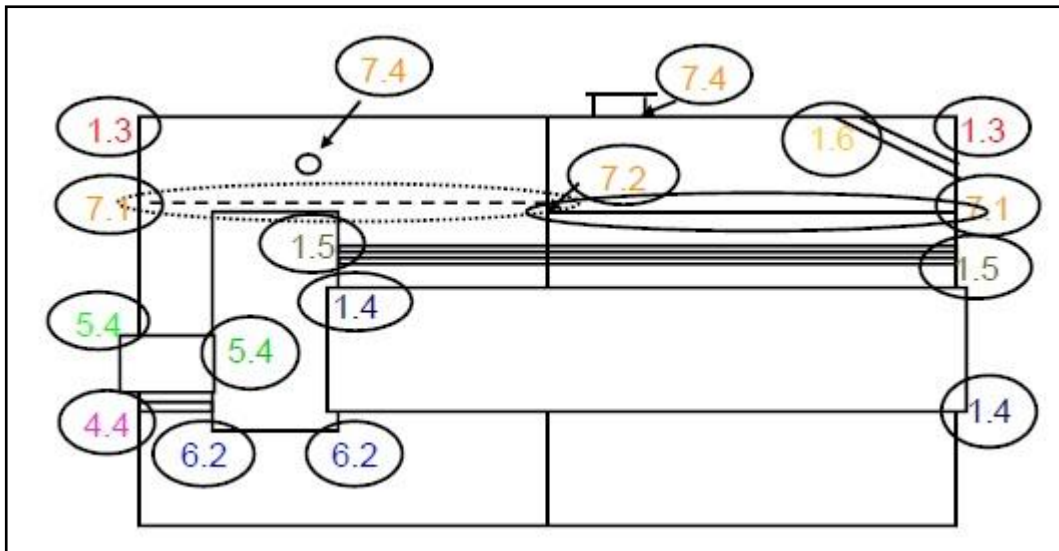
Schematic of boiler showing Critical Inspection Points [8]
